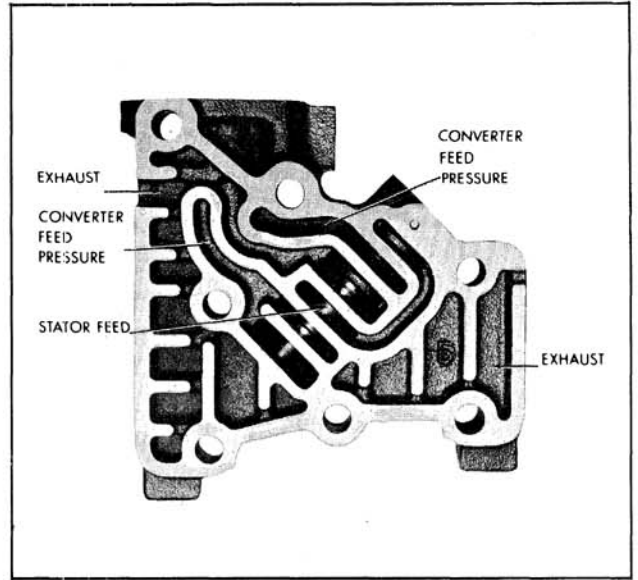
Stator Control Valve Body Oil Passage Identification
